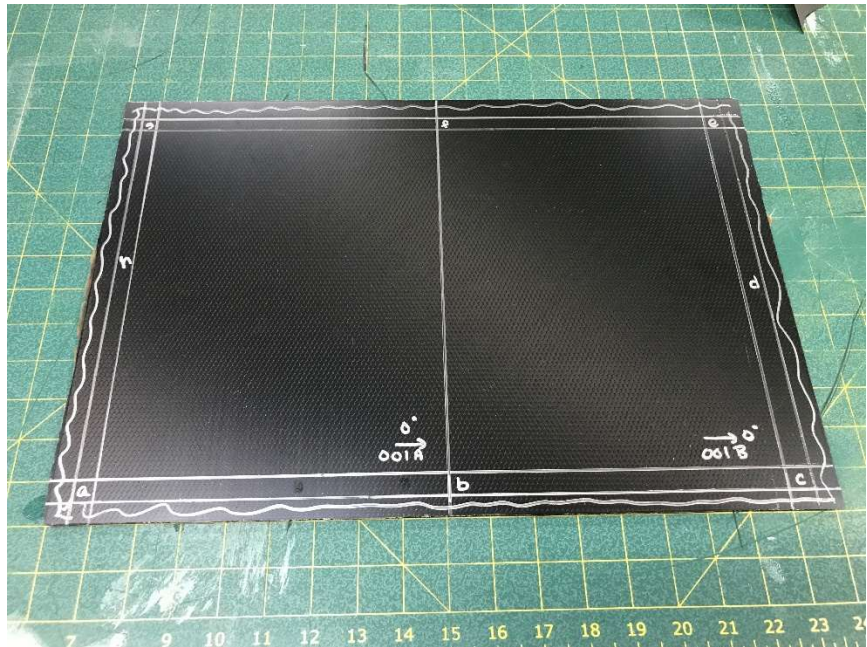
Tool Side of Panel 001 with Cut Lines Drawn
